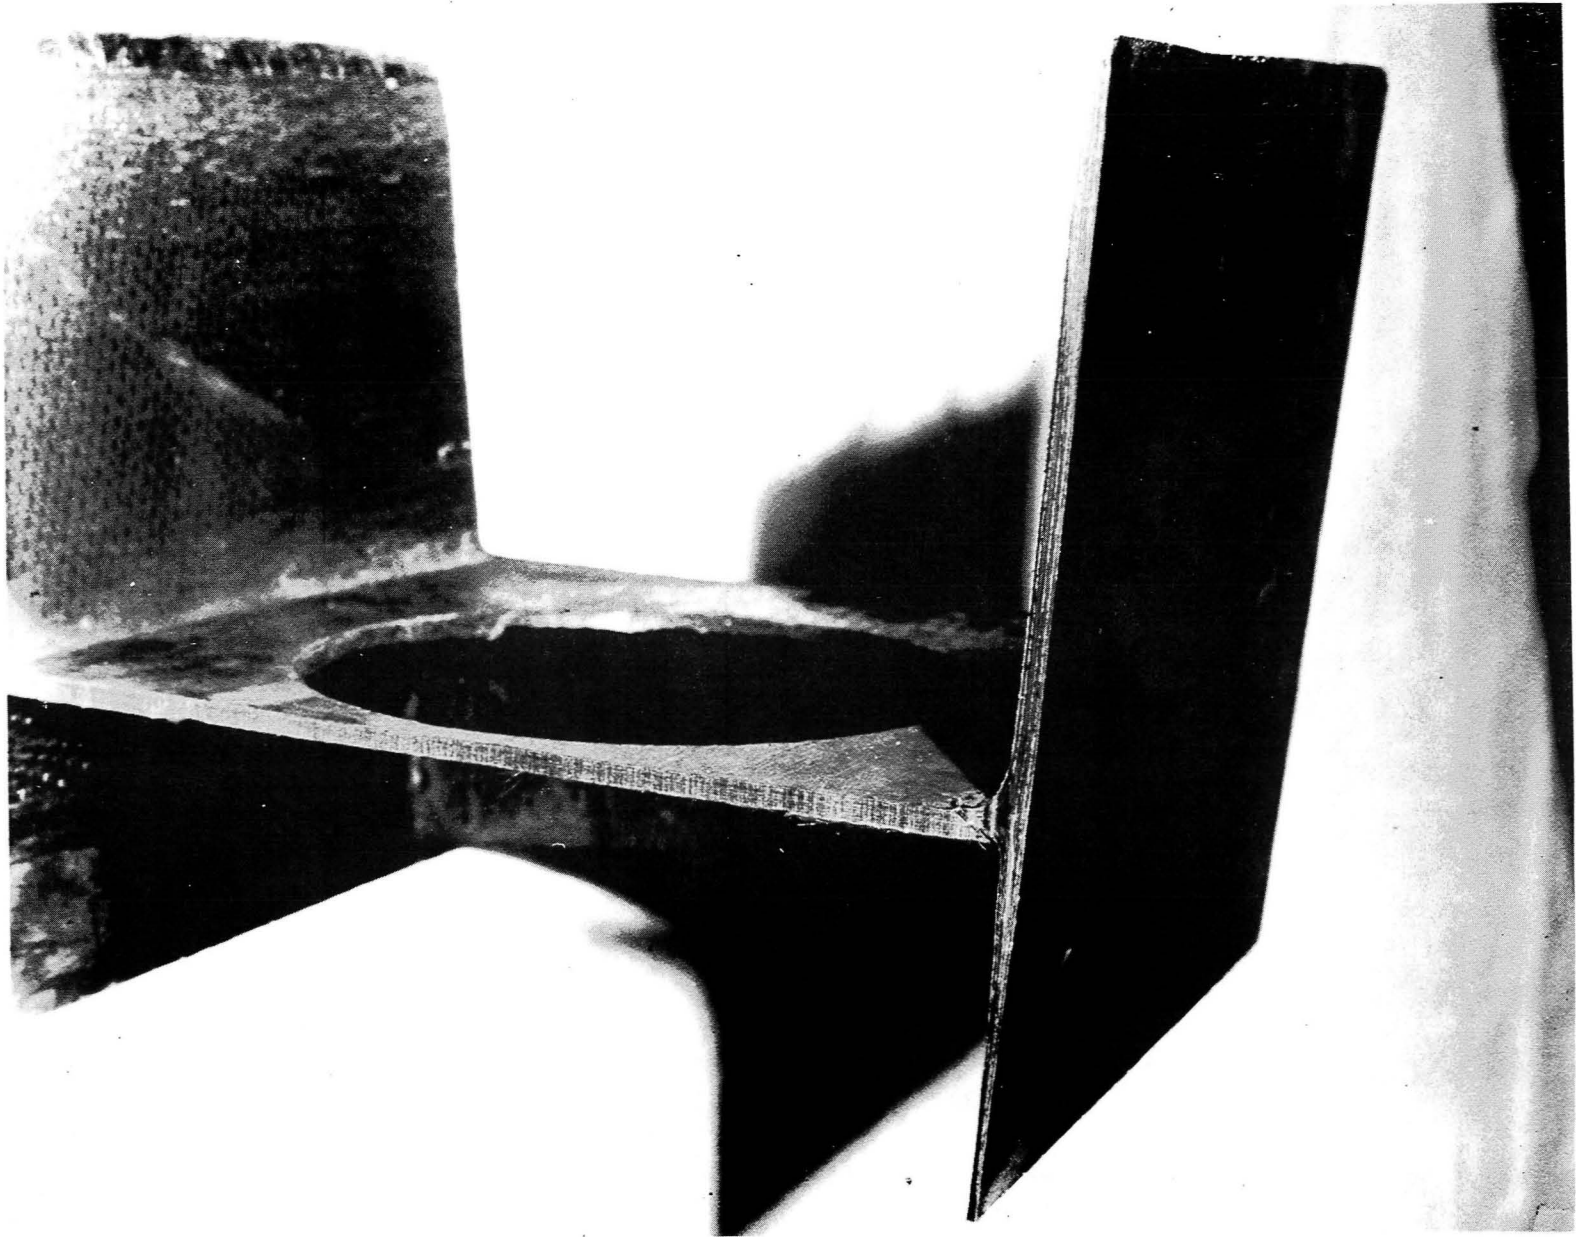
FRONT SPAR WEB TO FLANGE DAMAGE
